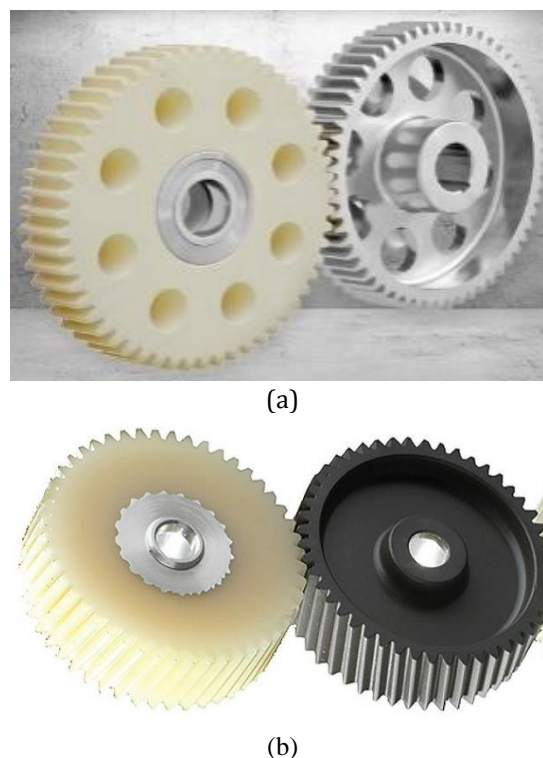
Metal-polymer gears: (a) helical, (b) spur.
